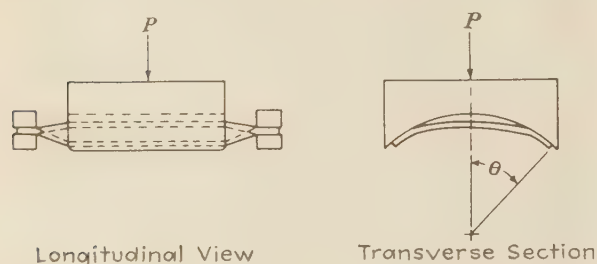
FORMING OF CONVEX CYLINDRICAL PART
